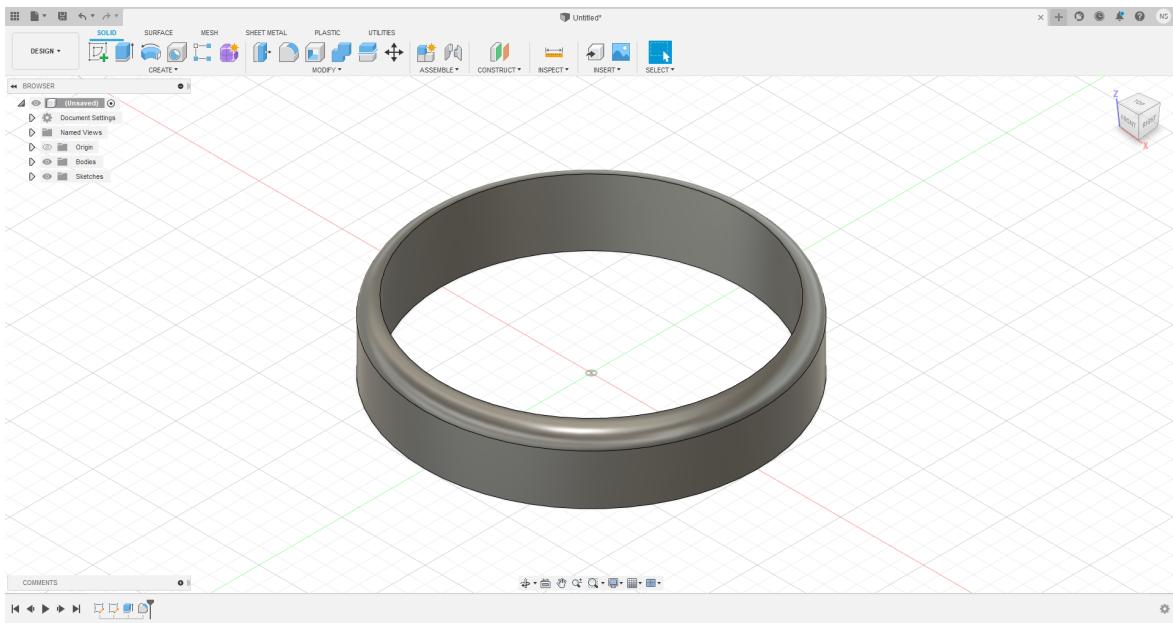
Fusion360 view after top edge smoothening by 1mm fillet
